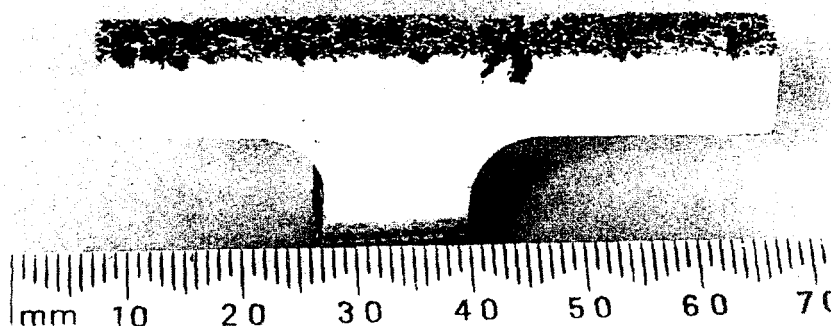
CROSS-SECTION OF THE PRESENT SEALING RING, SHOWING THE DEPTH OF CORROSION
